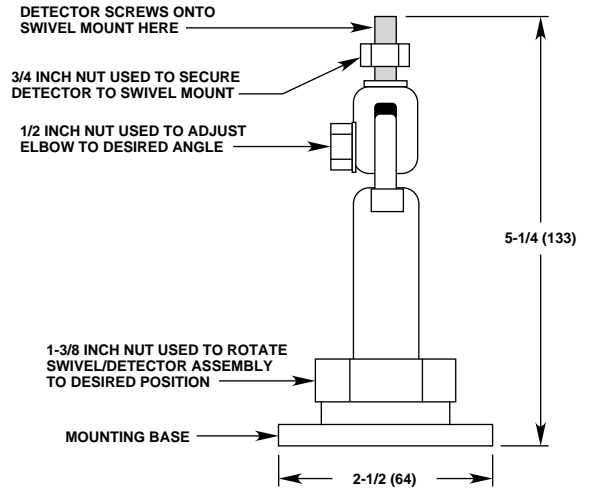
B—X3300 with Q9033 Mounting Bracket (EExe Installation Only)
